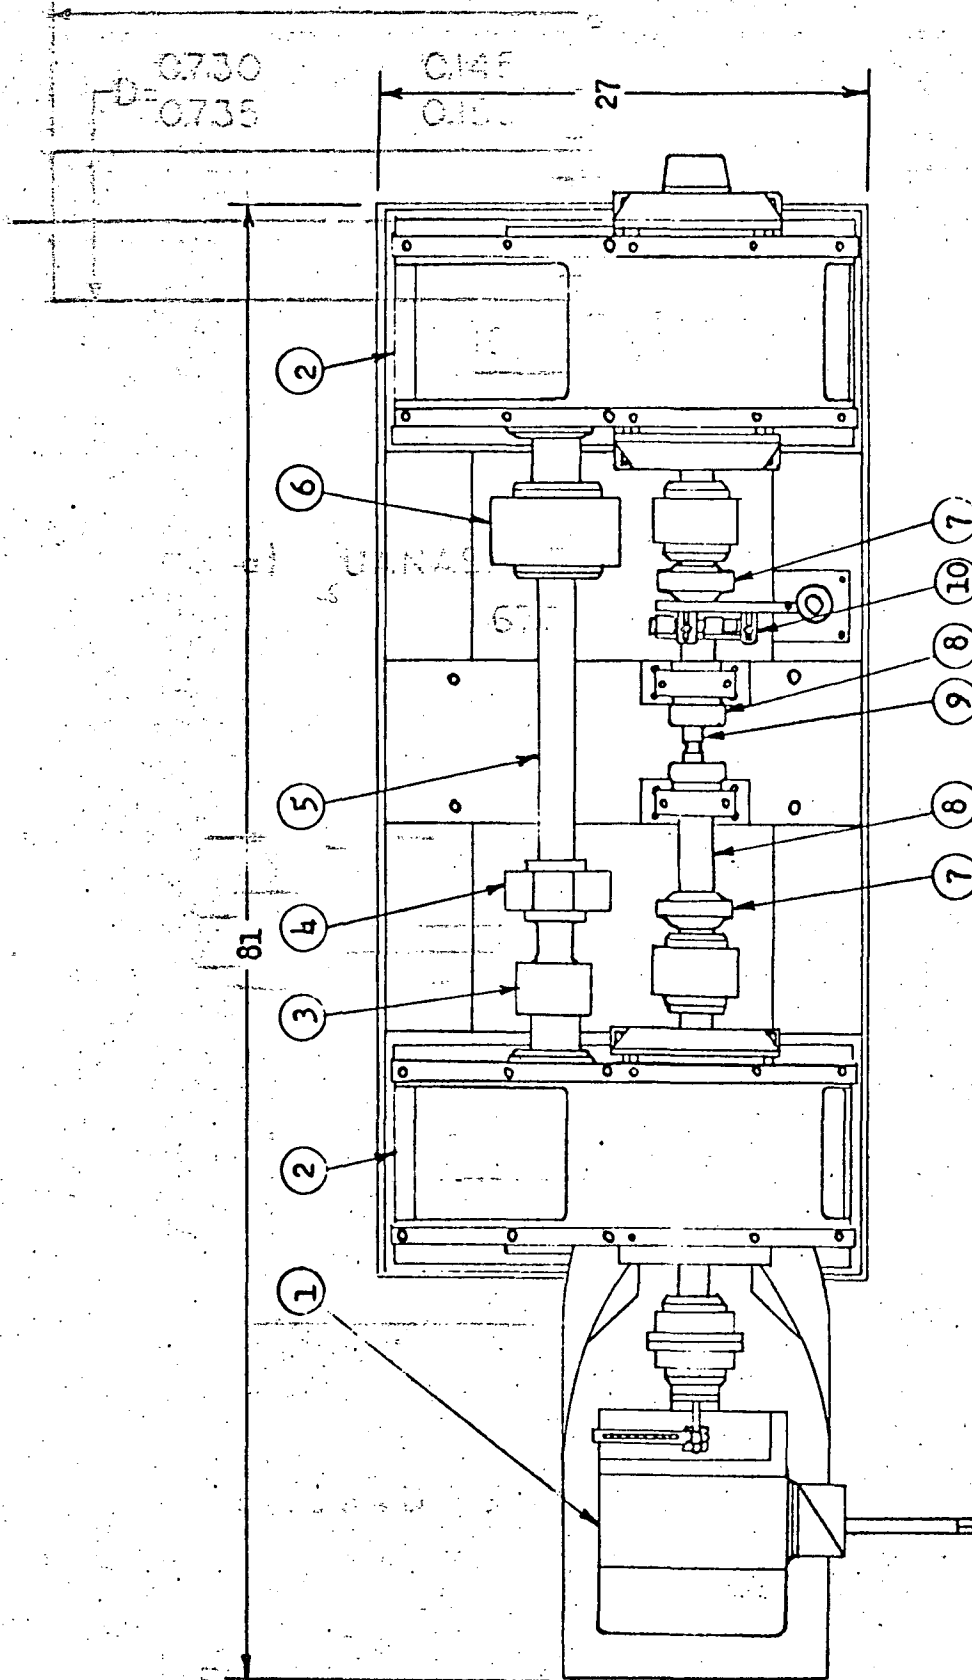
MABIE - GJESDAHL FATIGUE TESTING MACHINE
